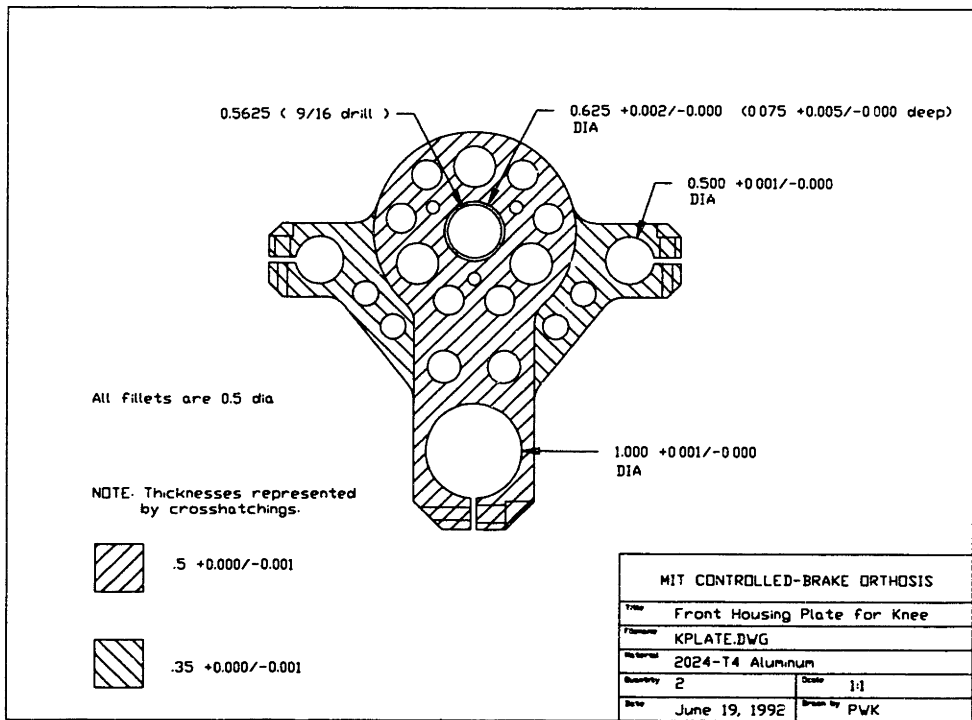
Front plate for knee gear housing (drawing 1 of 2).
